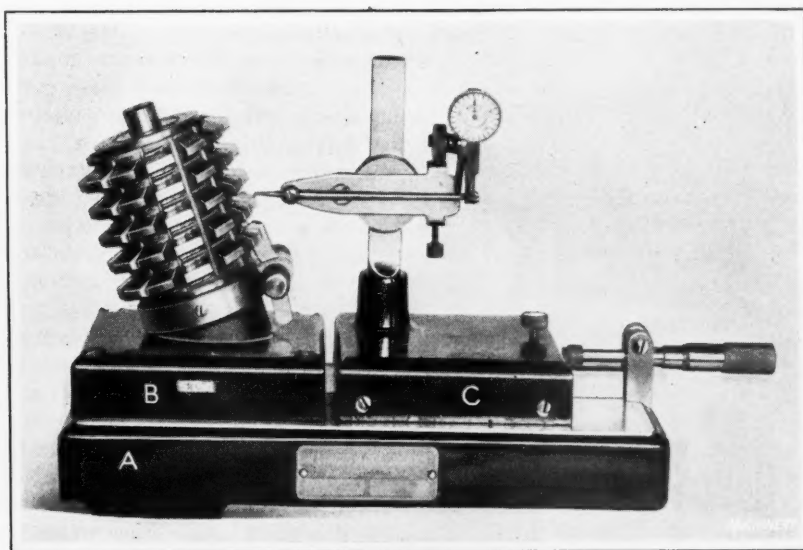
Machine developed for testing the Profile of Hob Teeth
